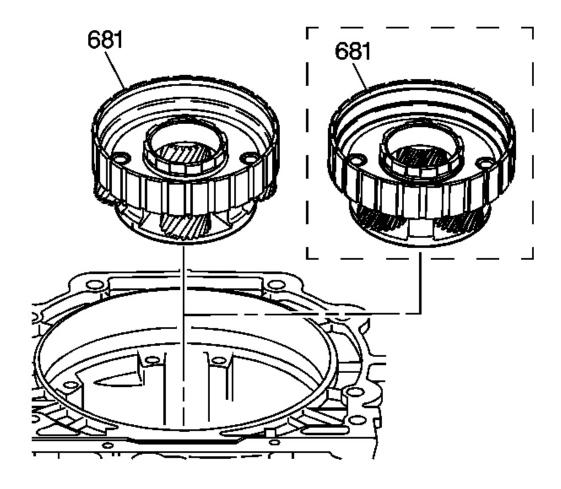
Identifying Reaction Carrier Assembly Courtesy of GENERAL MOTORS CORP.
